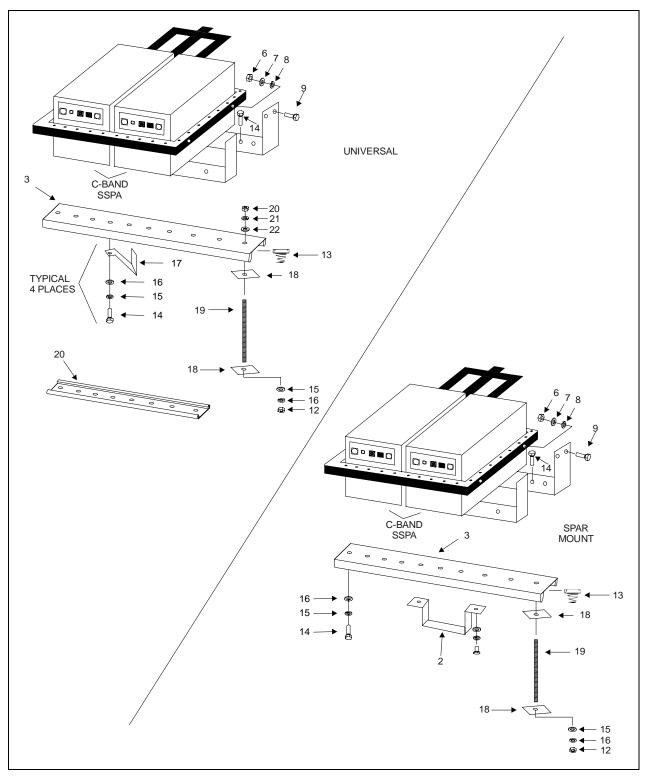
1:1 Redundant System Universal Mounting Kit (KT/6700)
